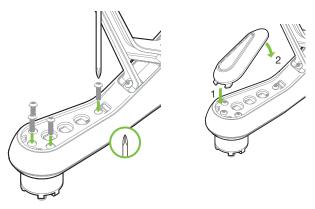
Motor Pod and LED Cover Attachment
